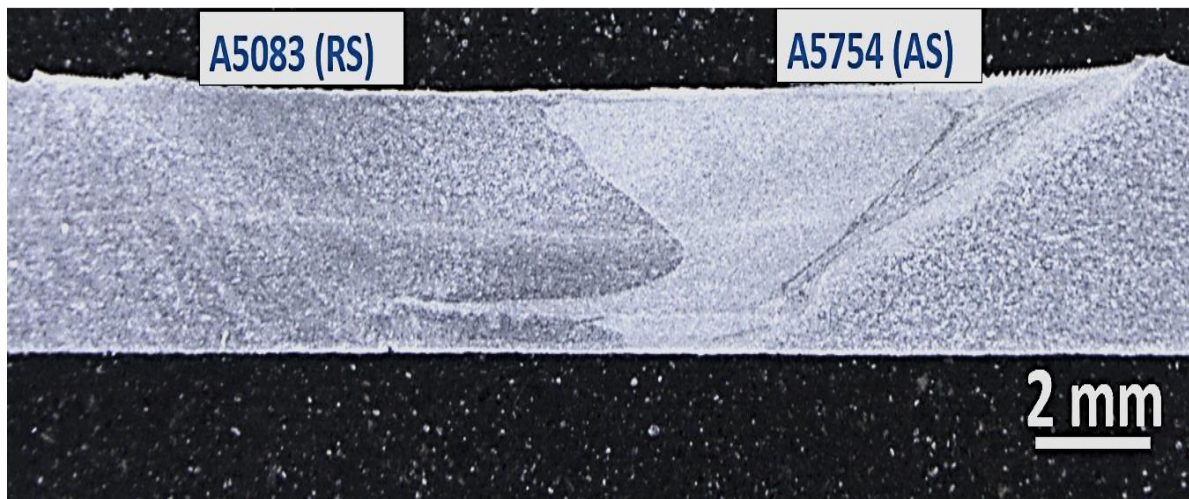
Macrostructures of transverse section of FSWed A5754-H111 and A5083-H111 joint (AS denotes advancing side and RS denotes retreating side of the weldment)
